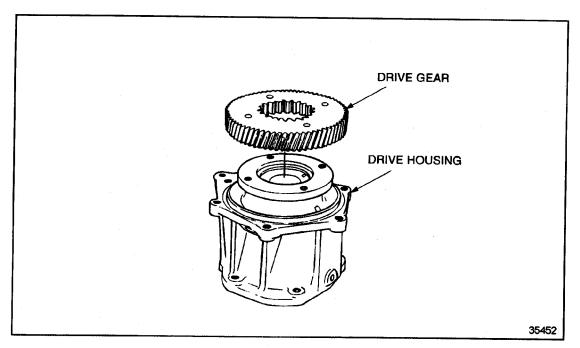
Air Compressor Drive Shaft Installation (Former Design)
